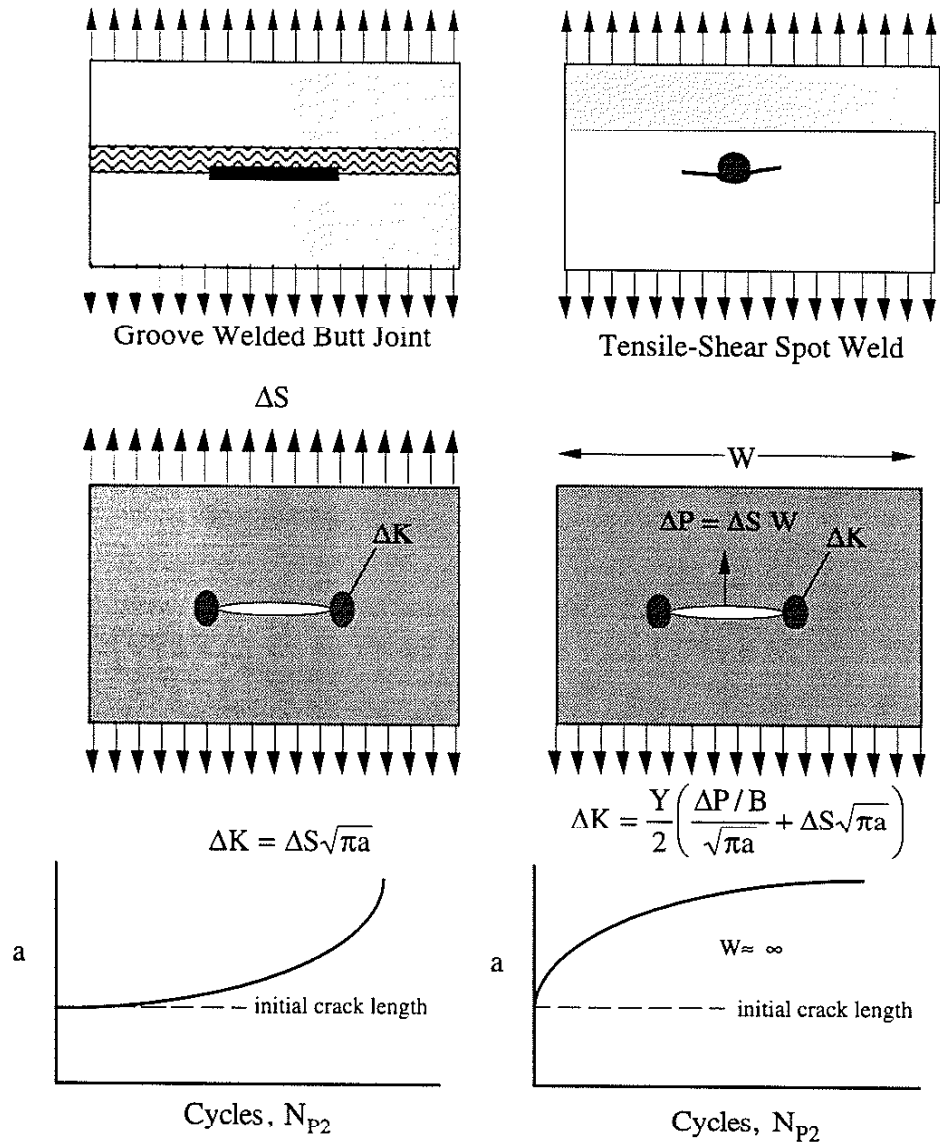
Two radically dissimilar patterns of Stage II crack growth in weldments². Most weldments have several sites of stress concentration.
